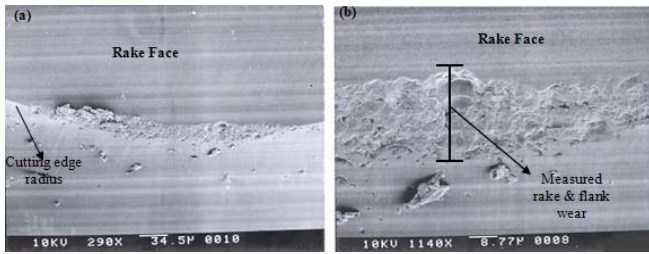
(a) & (b): SEM images of the cutting edge of the diamond tool after machining.
